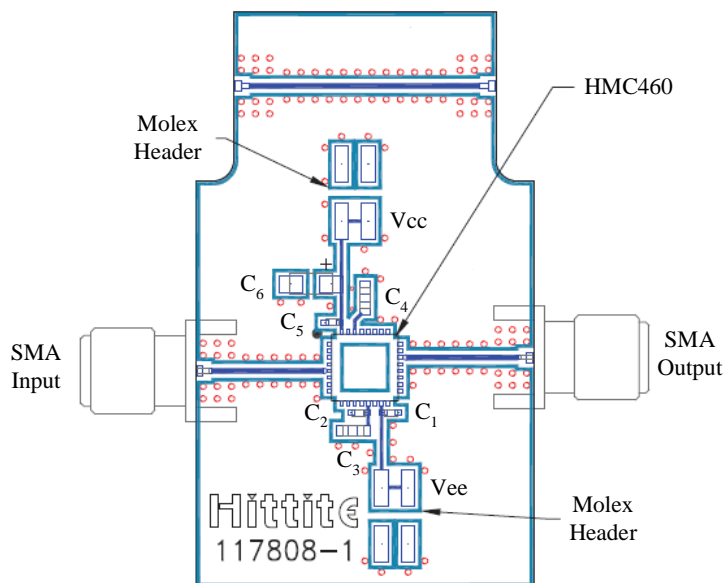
PCB layout of the HMC460 evaluation board [3].
